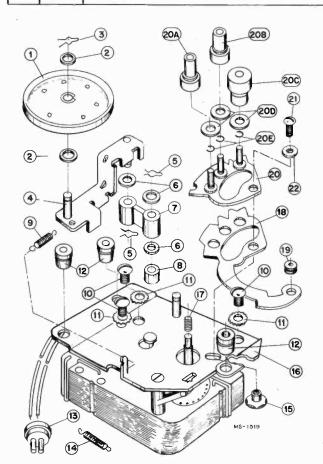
Assembly of Motors Stamped 5685, 5686 and 5687
